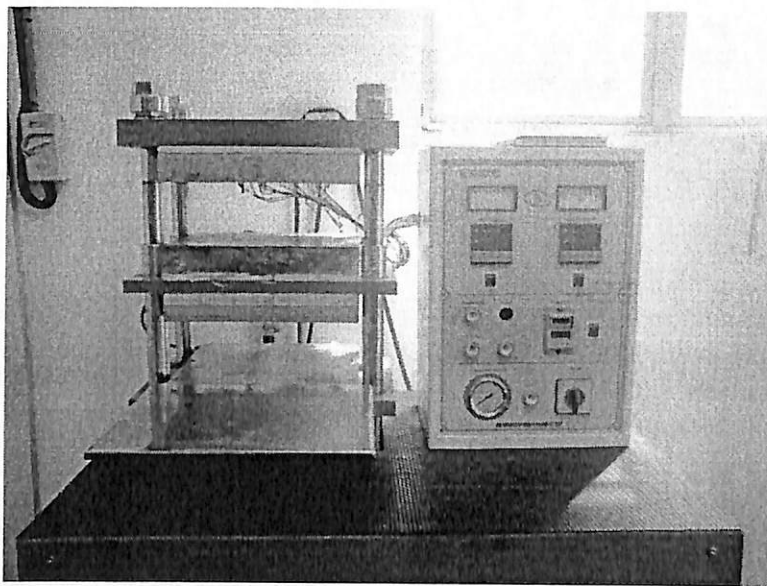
Kao-Tieh Compression (Moulding Machine)
